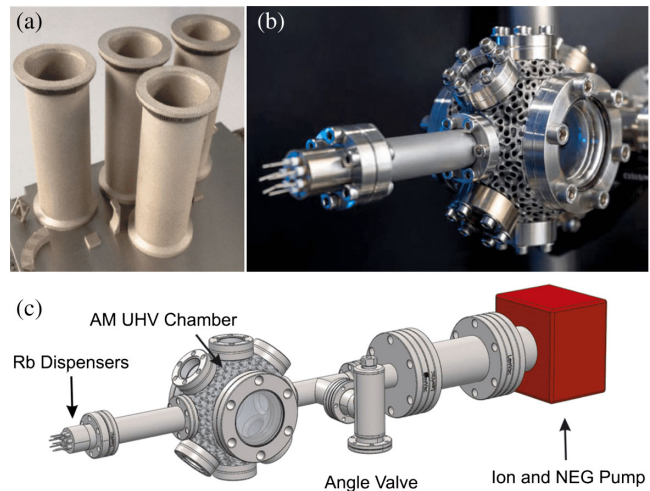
(a) Additively manufactured DN40KF tubes [228], (b) vacuum chamber, and (c) UHV test setup [148].
